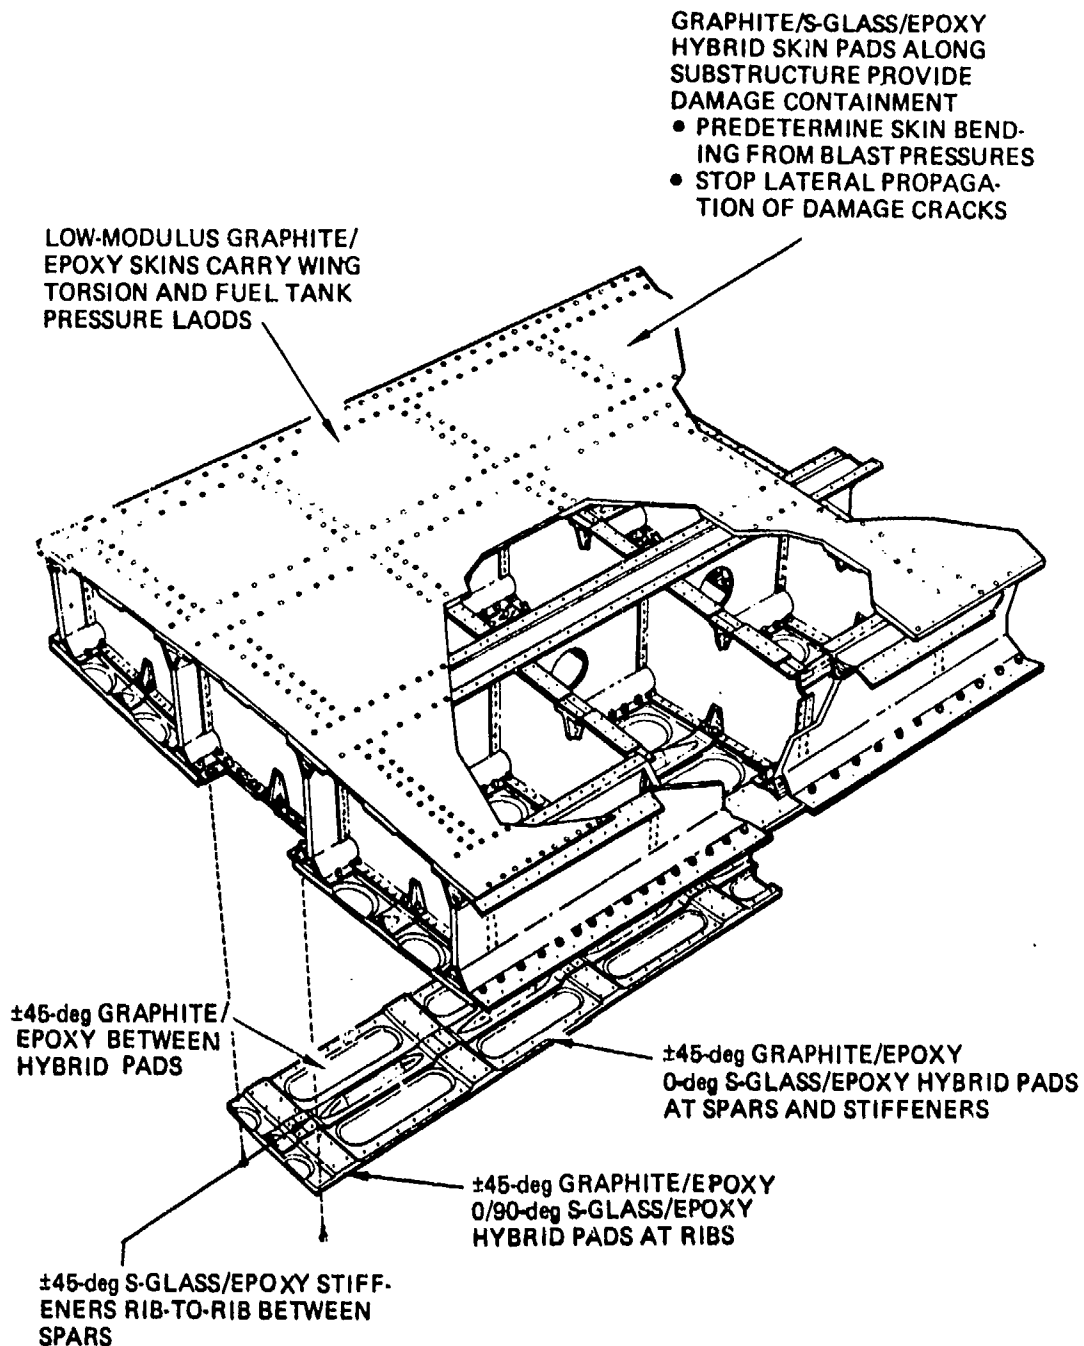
Battle-Damage-Tolerant Wing Final Design—Skins
